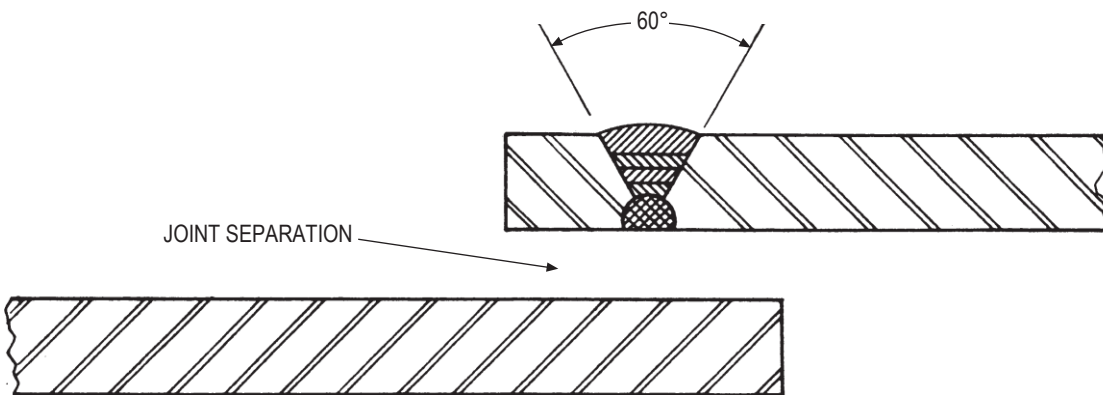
Welding fracture that extends into riveted joint
